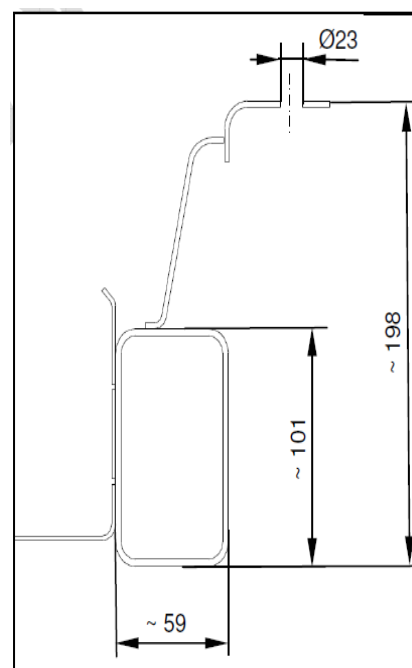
Section T-T (Amarok SC/DC)
